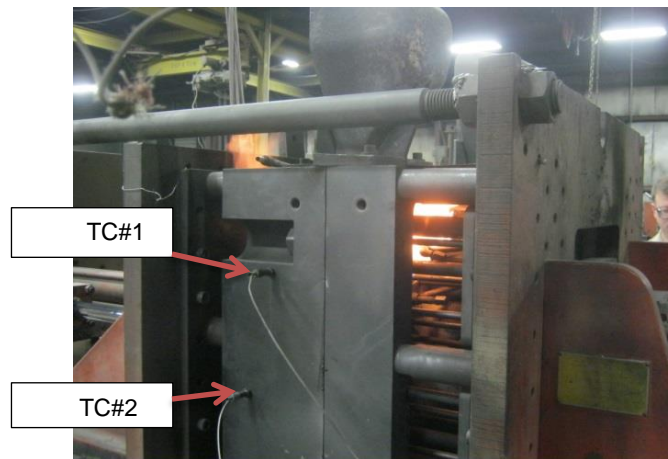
Closed mold showing location of the two thermocouples.
